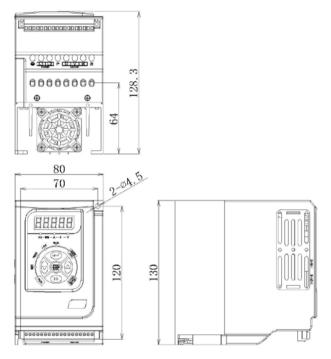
Schematic Diagram for Physical Dimensions and Mounting Dimensions 2.5.3 Mounting Hole Dimensions2:
